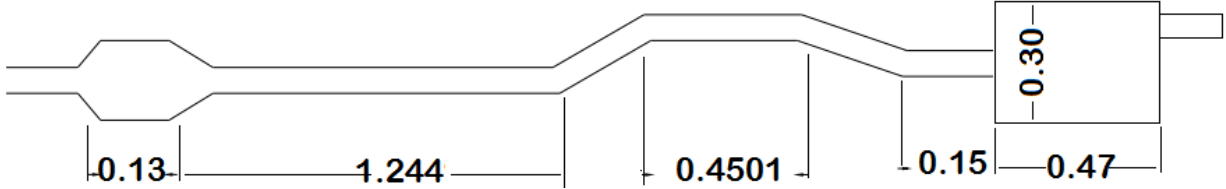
Dimensions of exhaust system for used car(all dimensions in m)
